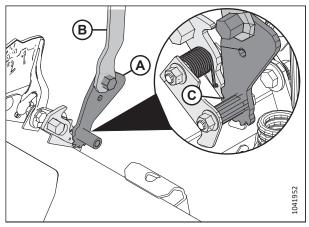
Multi-Tool Engaged with Left Float Setting Assembly
